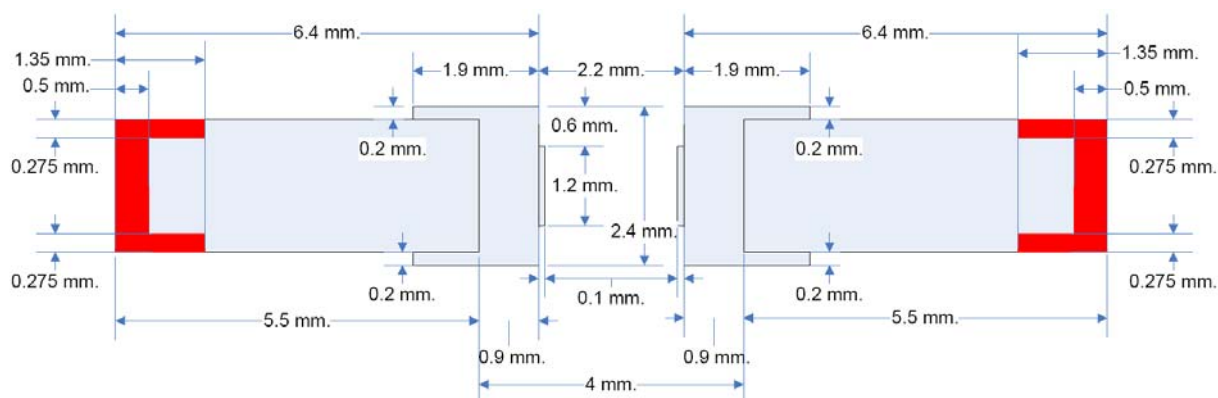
Triple 20 MHz crystal footprint with solder mask over pad
